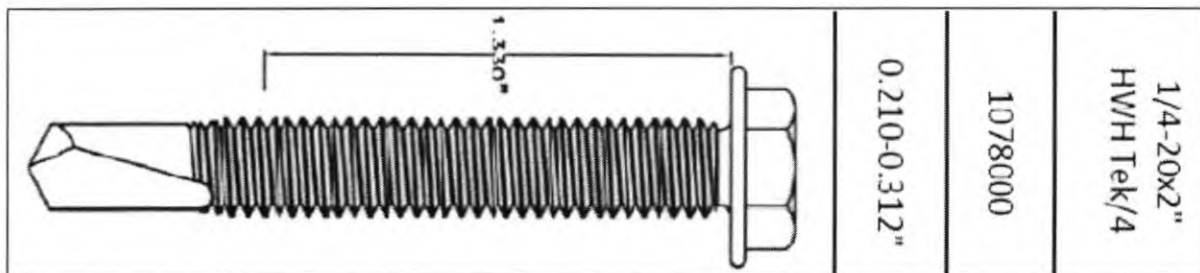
Fastener 1/4 - 20 x 2" HWH Tek/4
